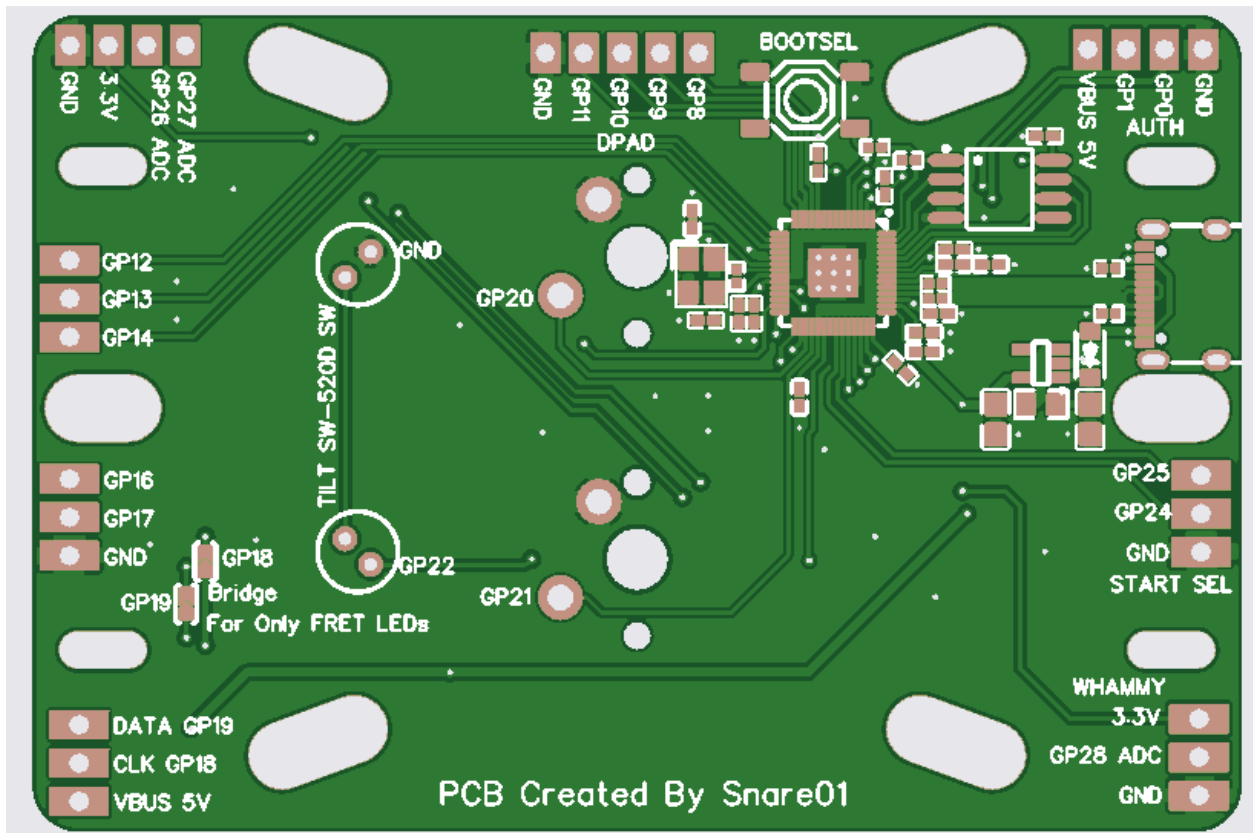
The Bare PCB visual inspect should look like this.
